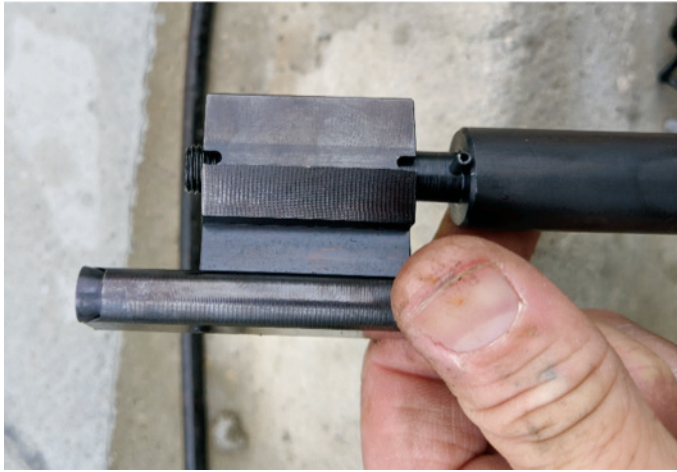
Clean Out Tool Head (6) slides onto Clean Out Tool Bar (5).
